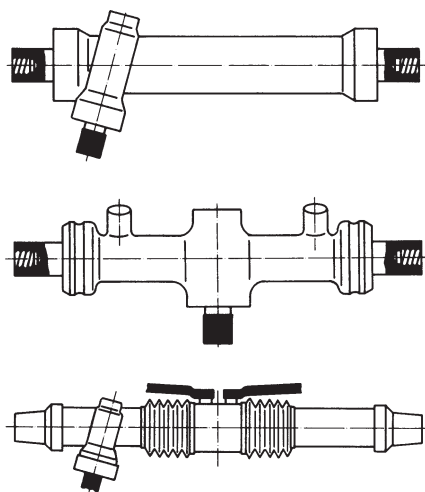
The three most common types of rack and pinion steering on left-hand drive passenger cars; right-hand drive vehicles have the pinion gear on the other side on the top and bottom configurations (shown in Fig. 4.39). The pinion gear can also be positioned in the centre to obtain longer steering rod travel.
